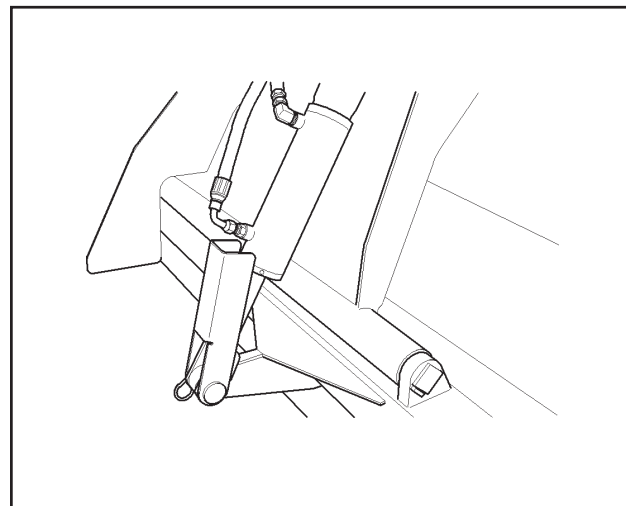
MECHANICAL BRUSH LIFT CYLINDER LOCK - LOCKED
